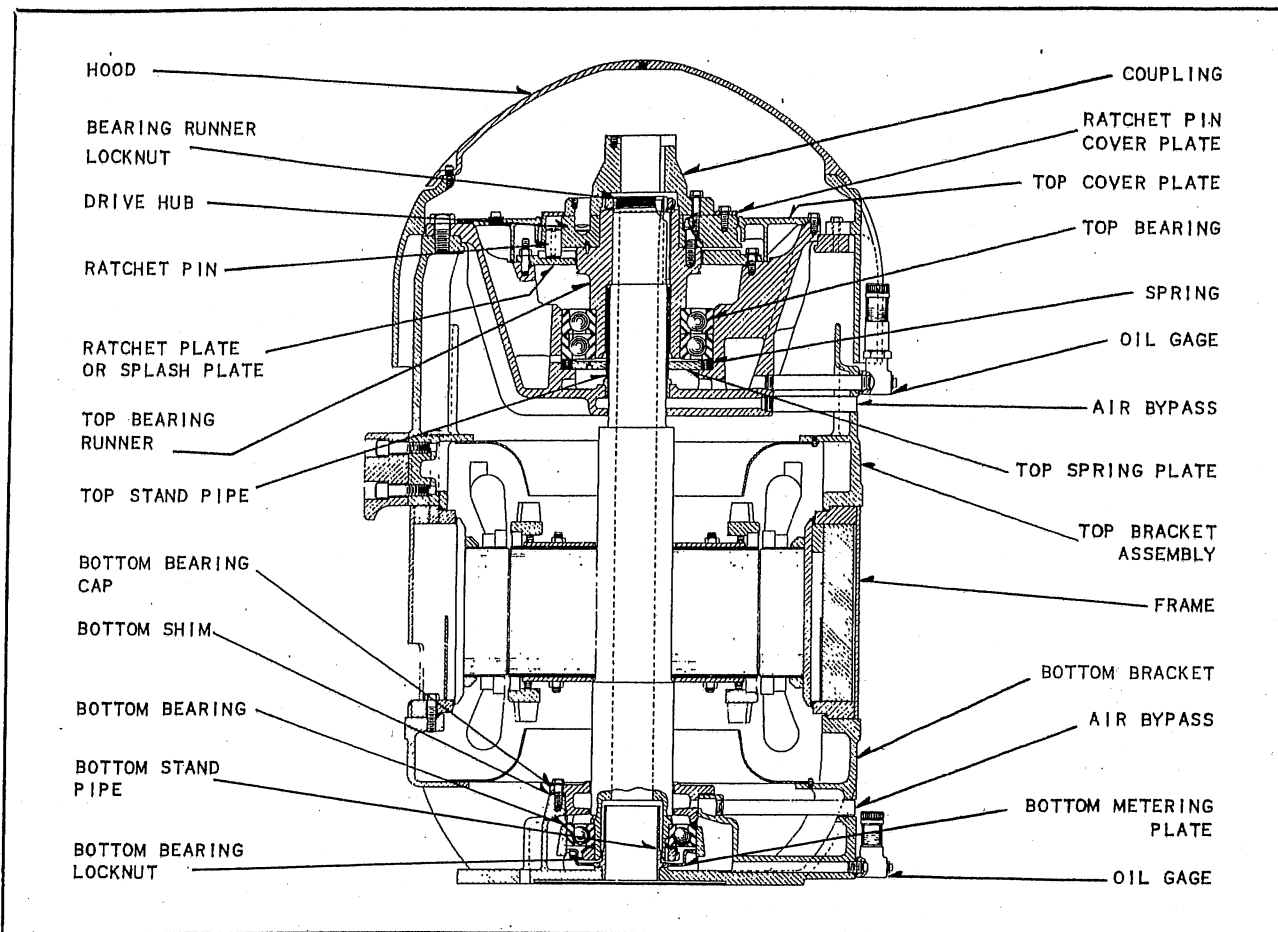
Frame 584 to 688.5 - Ball Bearing Construction (Hollow shaft illustrated but solid shaft motors have same construction except top coupling omitted).
